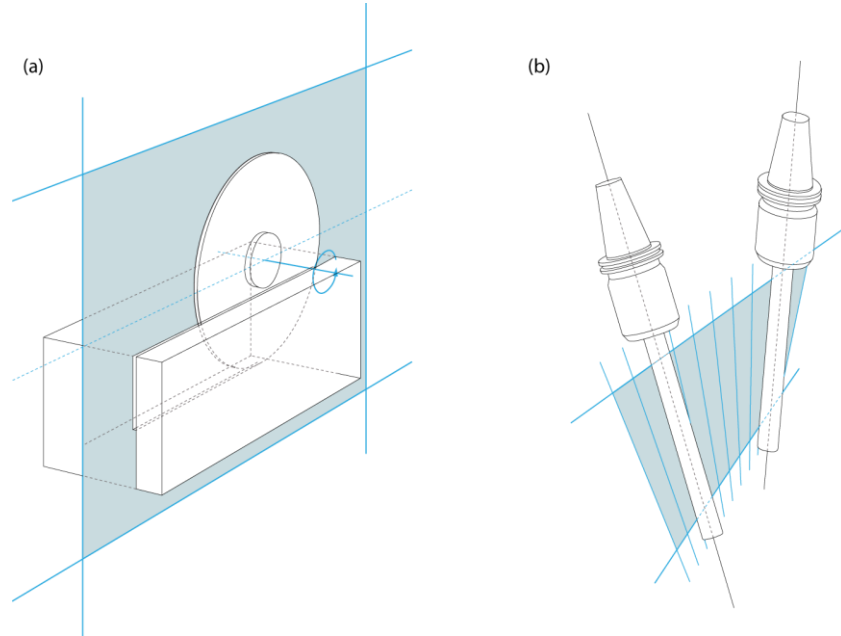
Surface shapes possible depending on the tool used for the machining process; (a) Circular saw blades cuts are constrained to planar surfaces; and (b) Profiling tool cuts are constrained to ruled surfaces.
